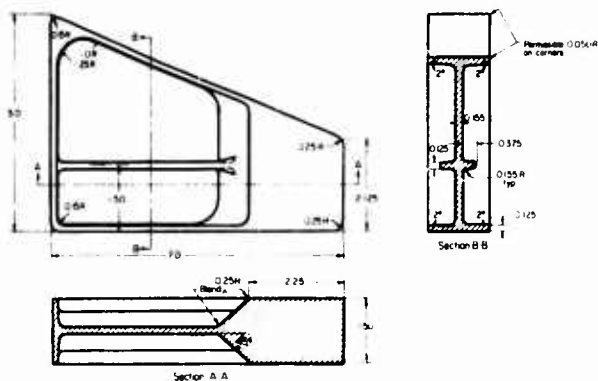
EXAMPLE FORGING FROM 6061 ALUMINUM(23)
